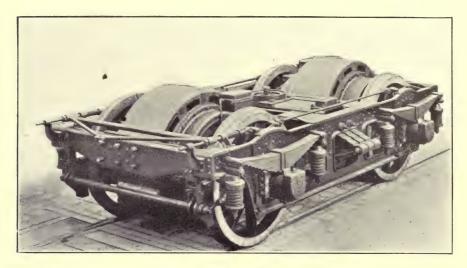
Valtellina Railway, Italy, Motor Truck for Passenger Cars, 1902.
